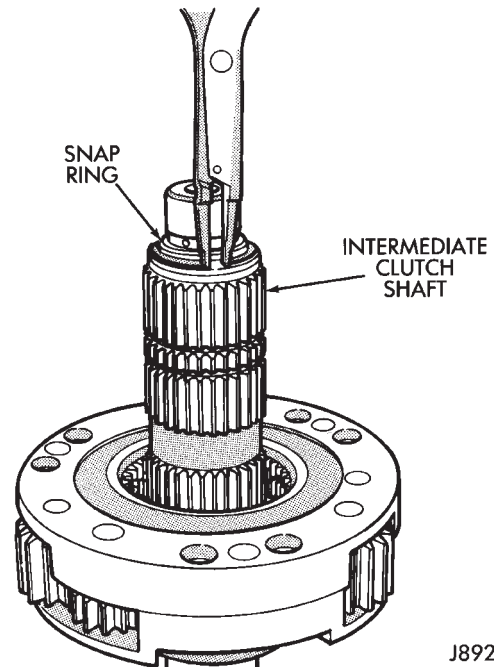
Intermediate Clutch Shaft Snap-Ring Removal
